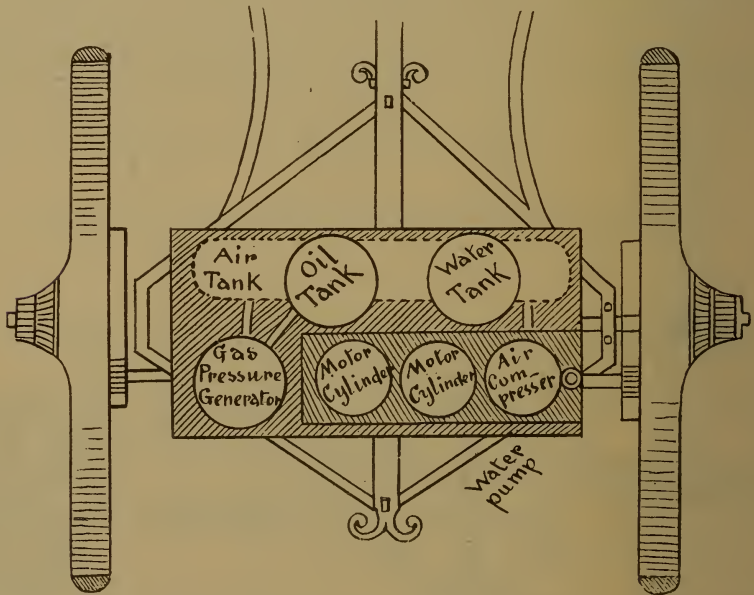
REAR END VIEW OF HORSELESS CARRIAGE.
